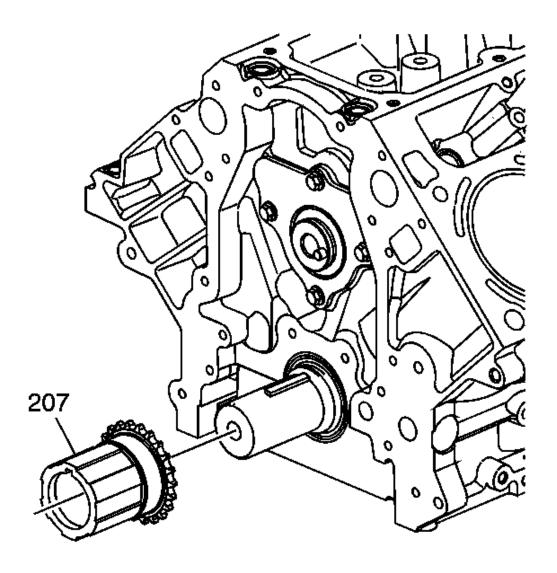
View Of Crankshaft Sprocket Courtesy of GENERAL MOTORS CORP.
